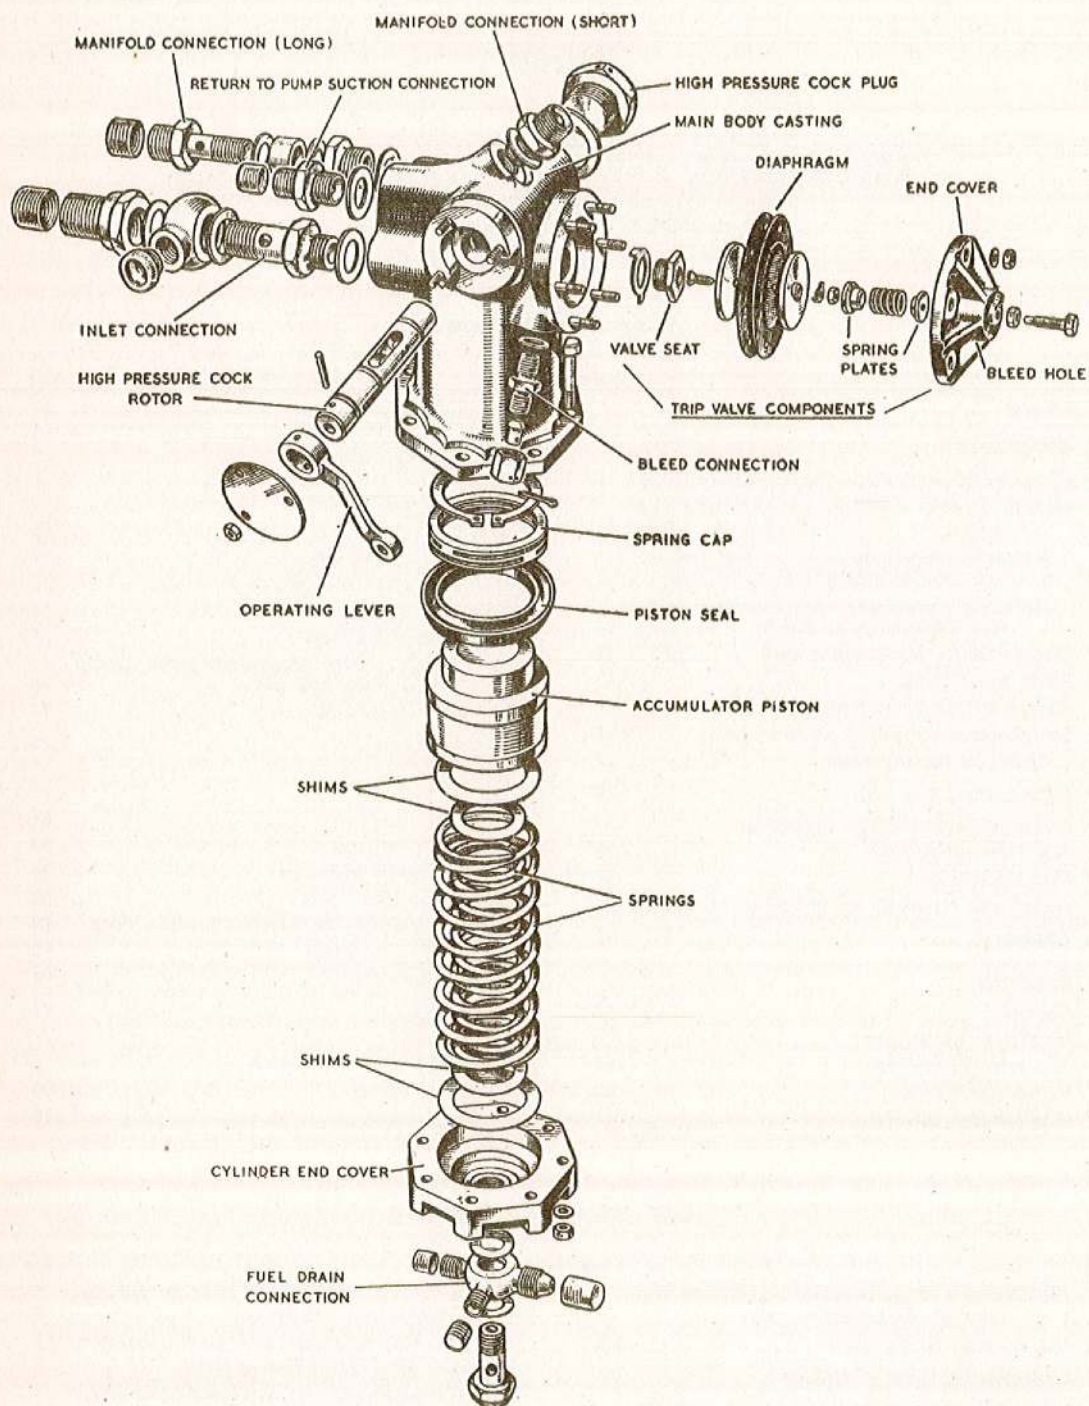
Exploded view of the combined accumulator, trip valve and high pressure cock
